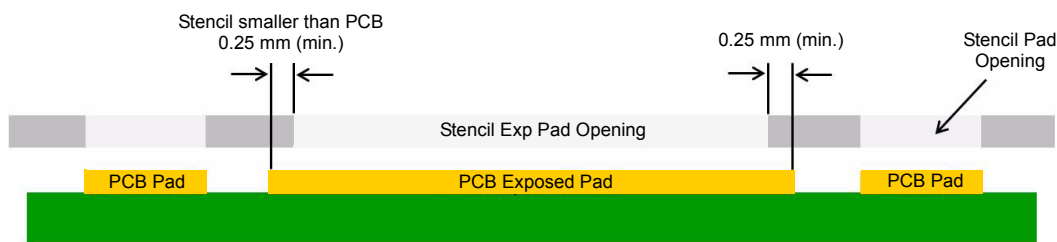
Reduced Solder Stencil Aperture for Exposed Pad
